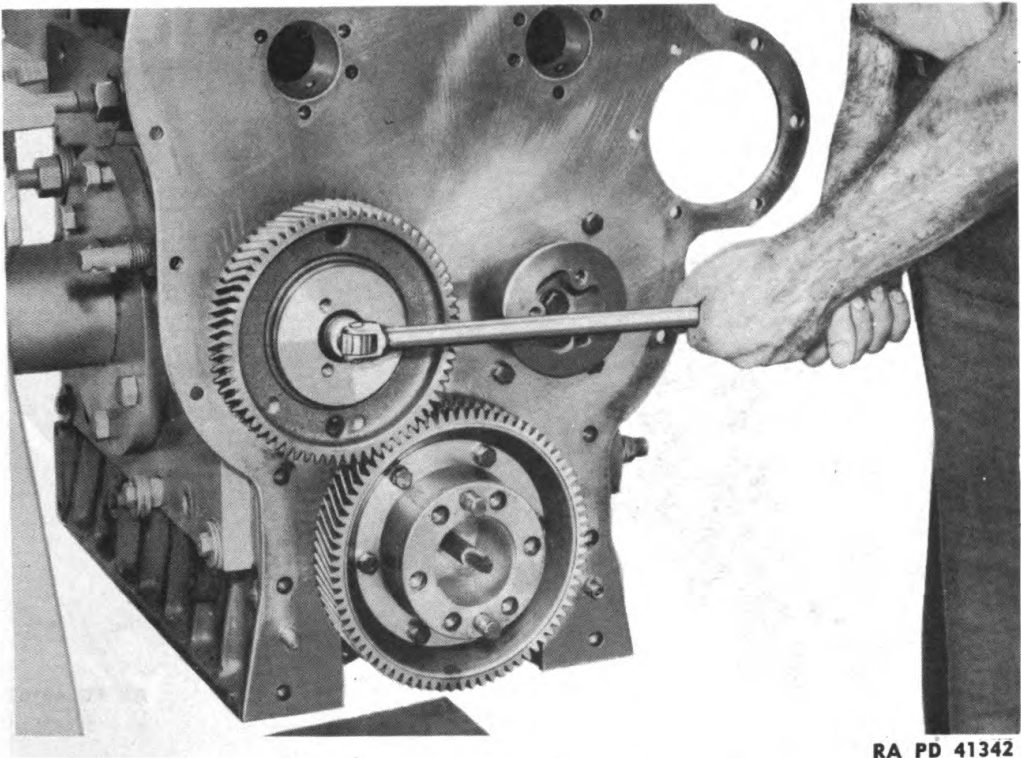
Removing Lock Screws from Camshaft Intermediate Bearings
